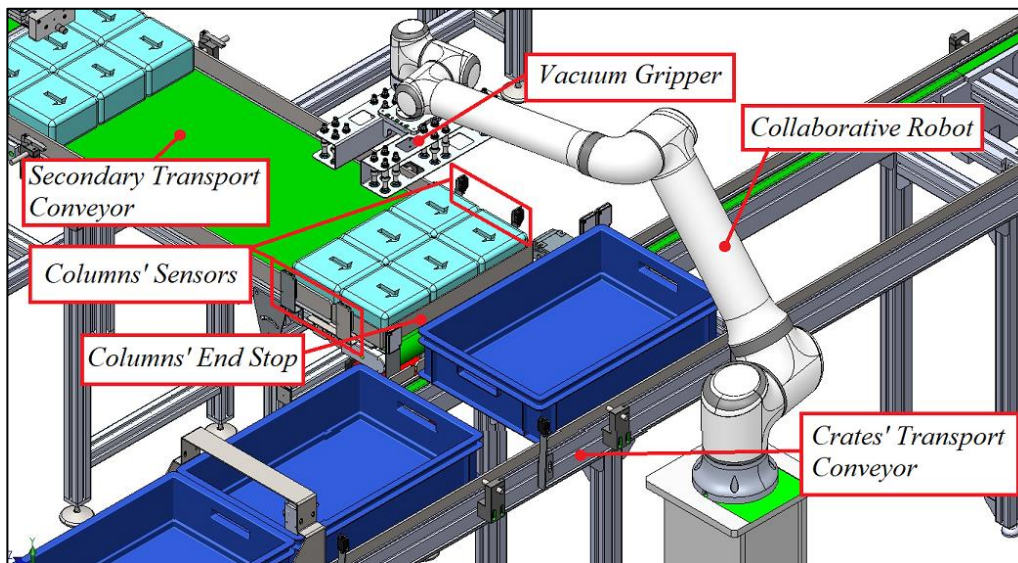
Two-Columns Forming Equipment and Pick and Place Equipment.
